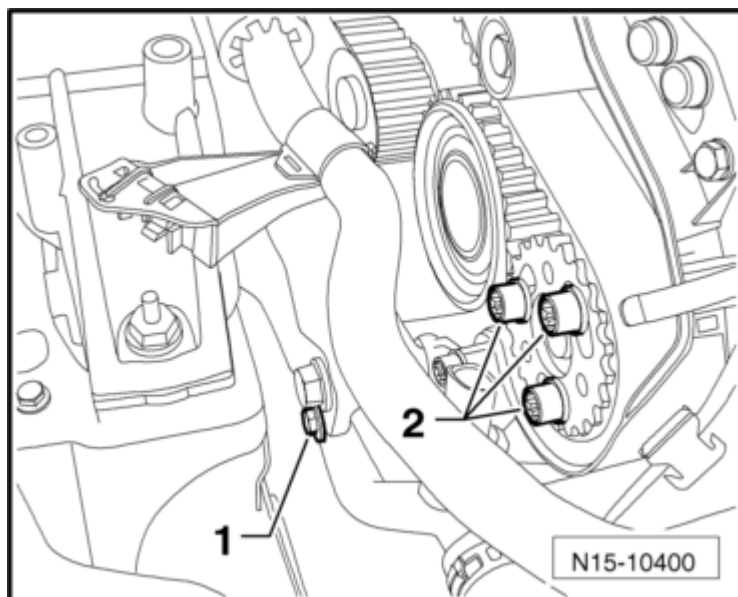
Identifying Coolant Pipe Bolt -1- And High Pressure Fuel Pump Toothed Belt Gear -2-
